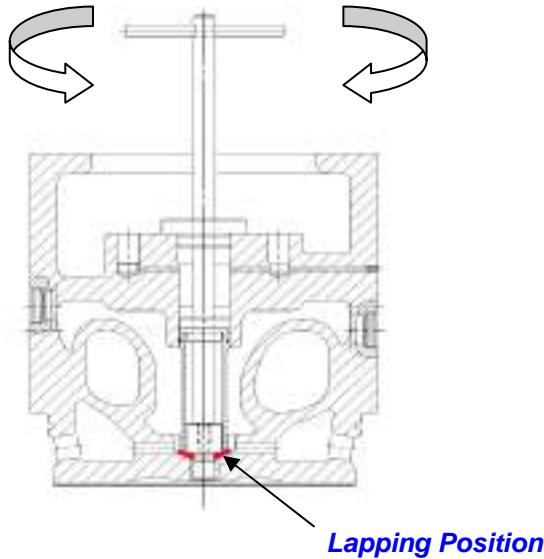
Position of The Fuel Injection Valve Lapping Tool
